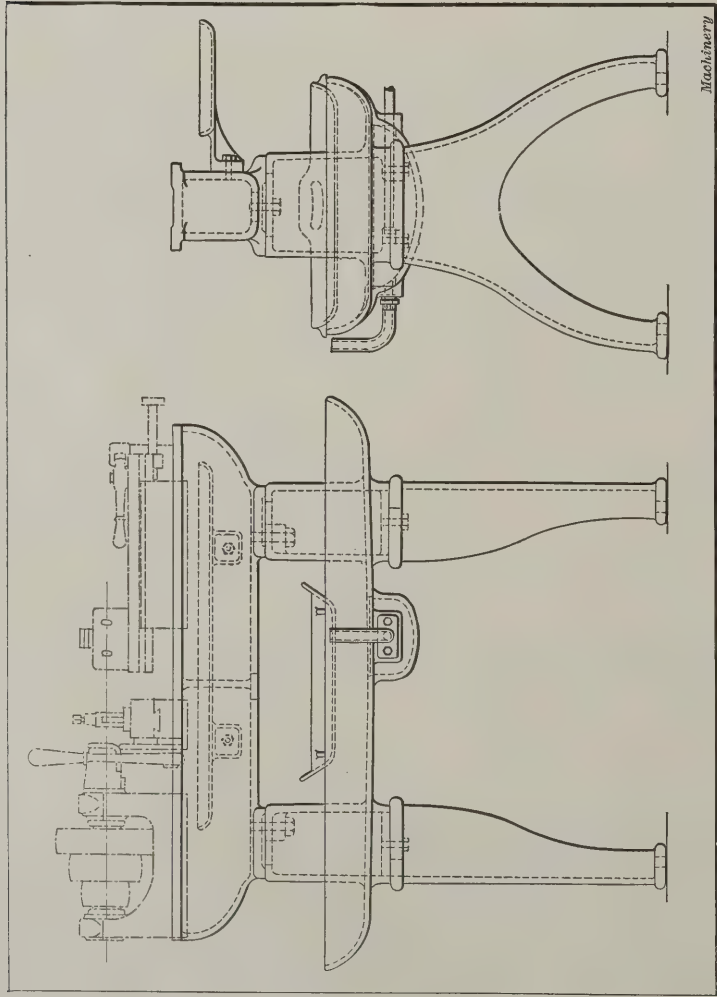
Bed for Turret Lathe, showing Complete Cutting-tool Lubrication Arrangement
